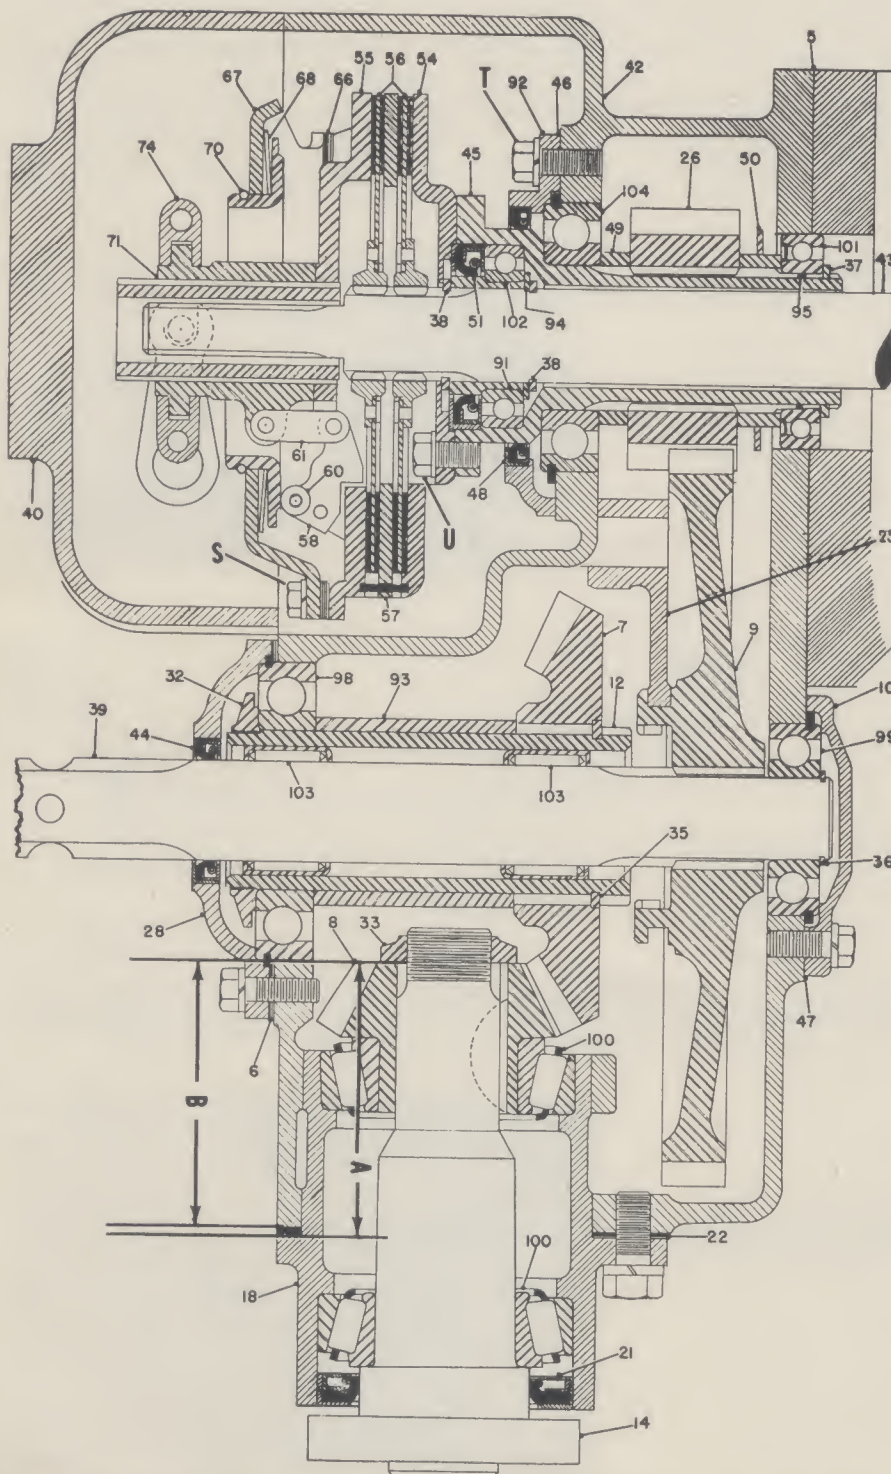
Sectional view of combined continuous type pto and belt pulley drive. Shaft (43) passes through hollow transmission and clutch shafts to engage the engine flywheel. Refer to Fig. 0619 for parts legends.
